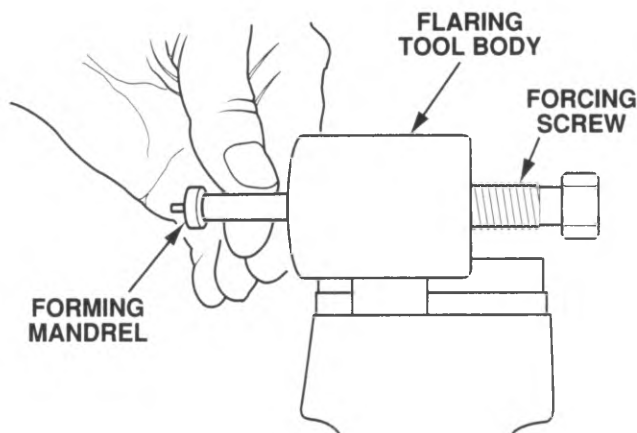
, Forming Mandrel and Forcing Screw for ISO Flare
